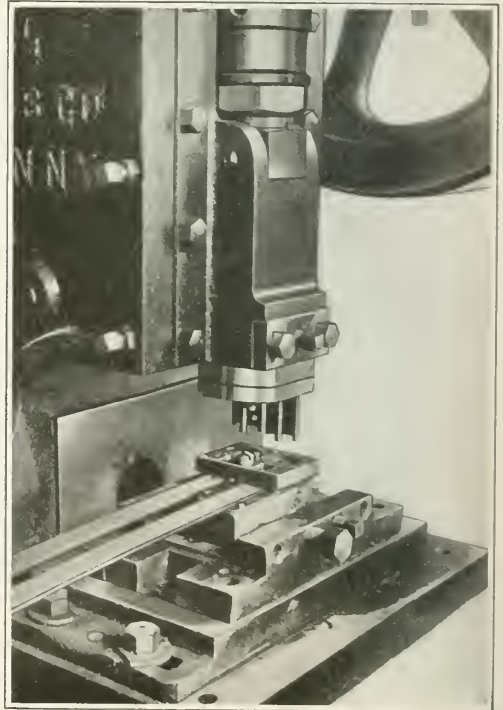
Close View of Die used on E. W. Bliss Press to punch One End of Two Blades at Each Stroke
